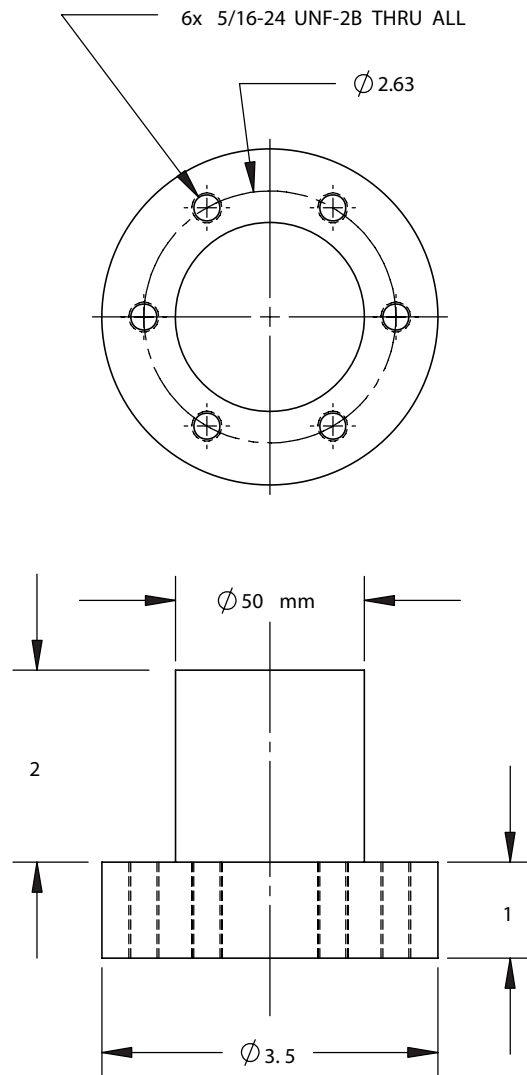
Drawing of the aluminum adapter used to connect the Sensotec load cell to the Instron grip. Dimension in inches unless otherwise noted.
